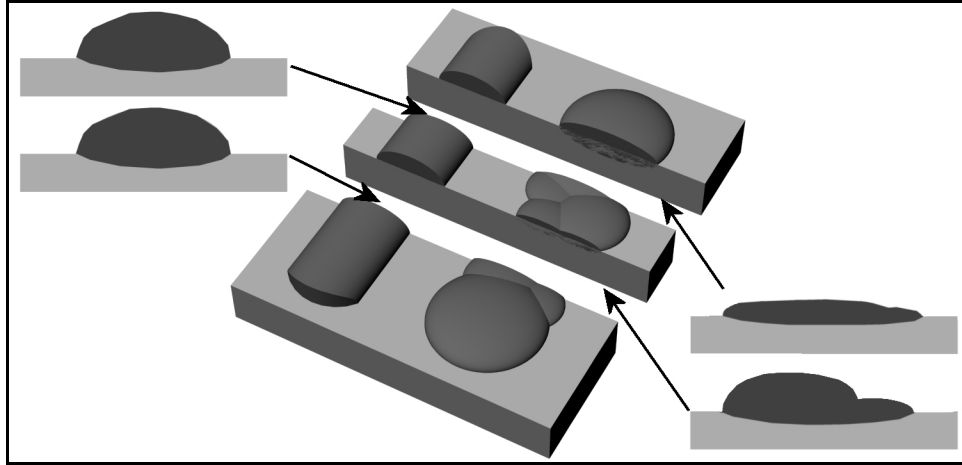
Sample Cross-Sections Profiles from Stable (left) and Unstable Weld Beads
